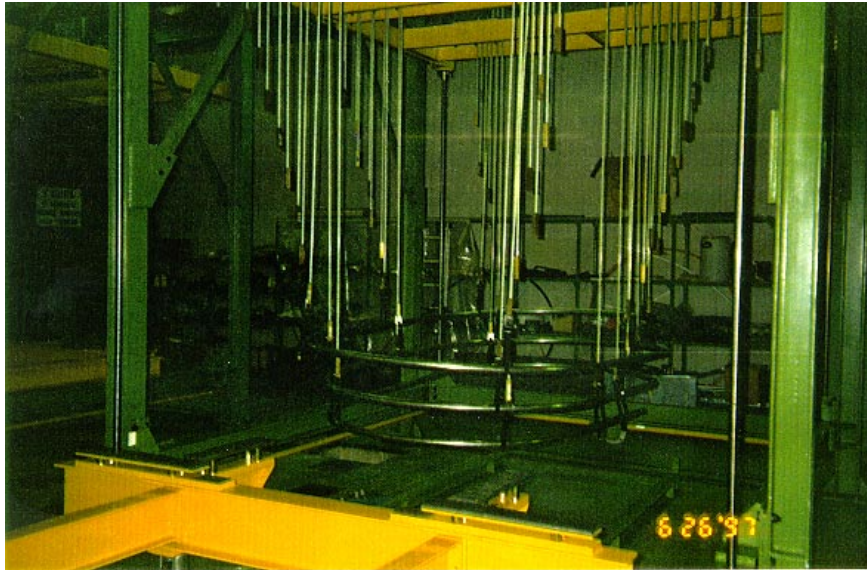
Tool for Transferring Reacted Conductor from Mold to Radial Plate
